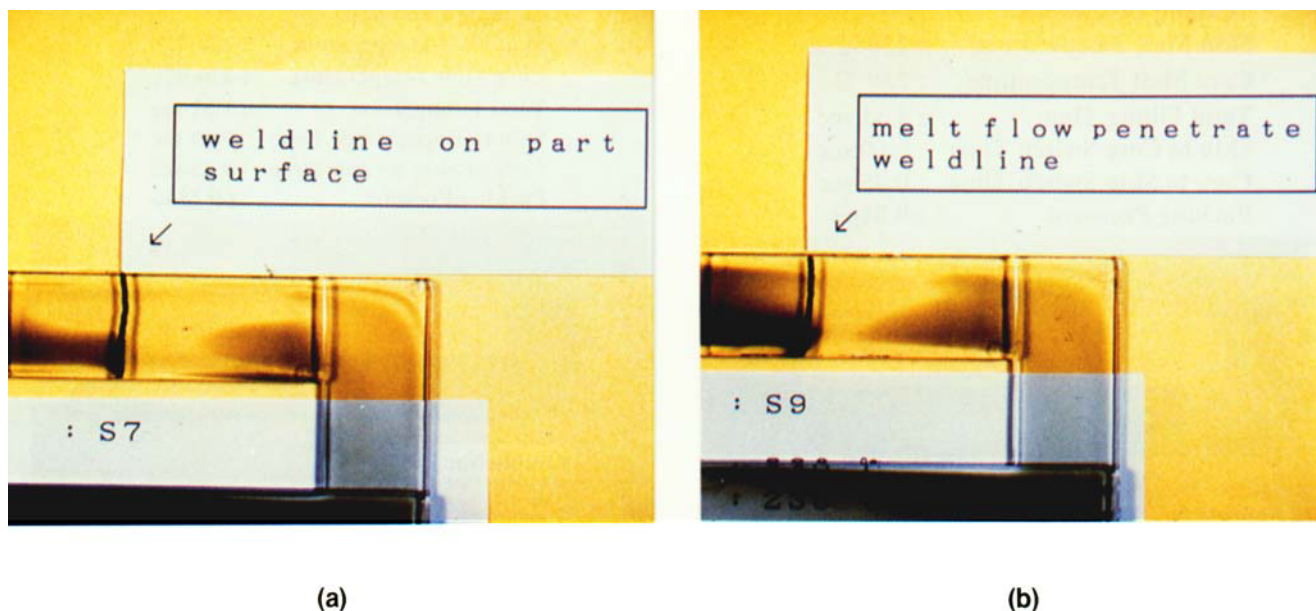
Enlarged view of the weld line area for sequential injection of the molded part (cavity II): (a) without applying packing pressure; (b) with applied packing pressure of 60 MPa.
